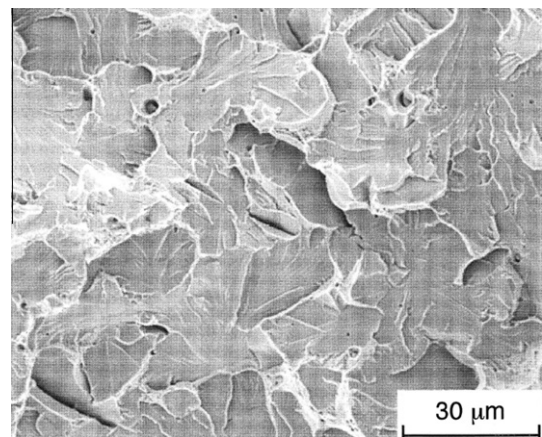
Fracture surface about 12 mm inside from the crack initiating point.
